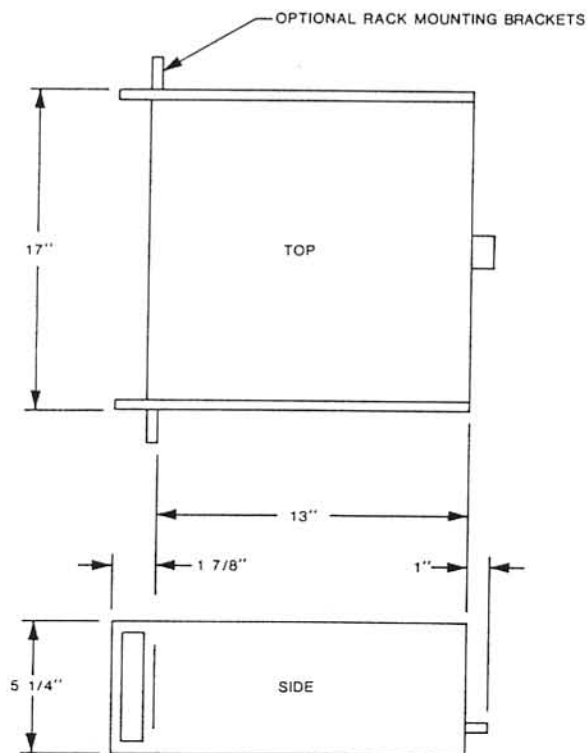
MODEL 7514 OUTLINE DIMENSIONS
